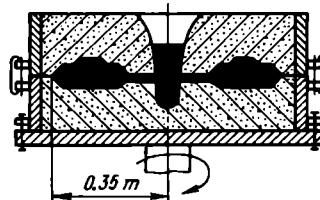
Determining the rotational speed of a vertical mold in the centrifugal casting machine
